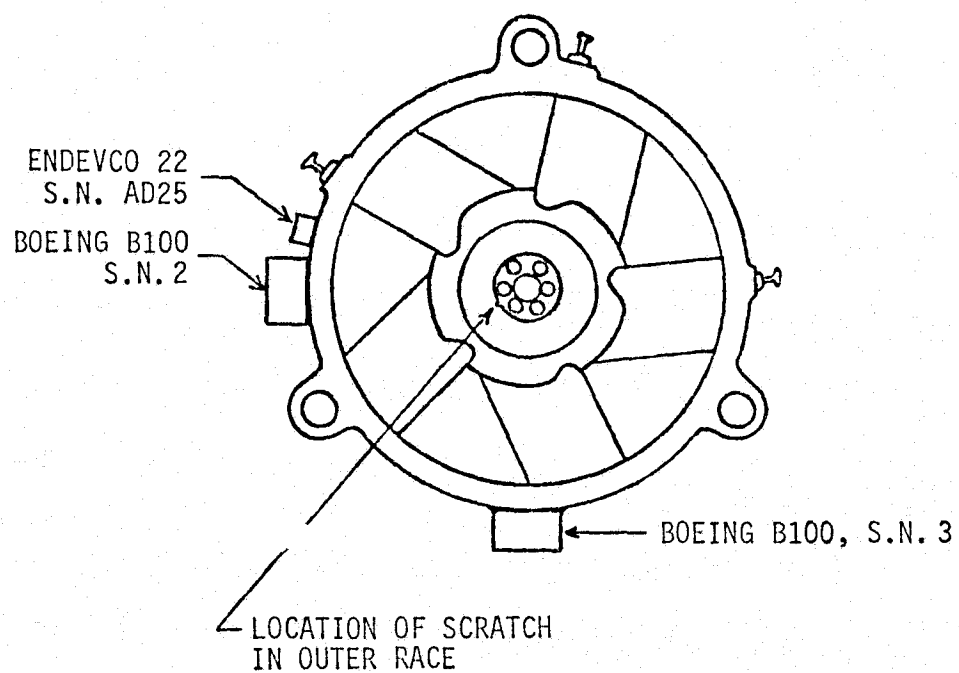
BEARING OUTER RACE DEFECT POSITION IN ROTRON FAN
